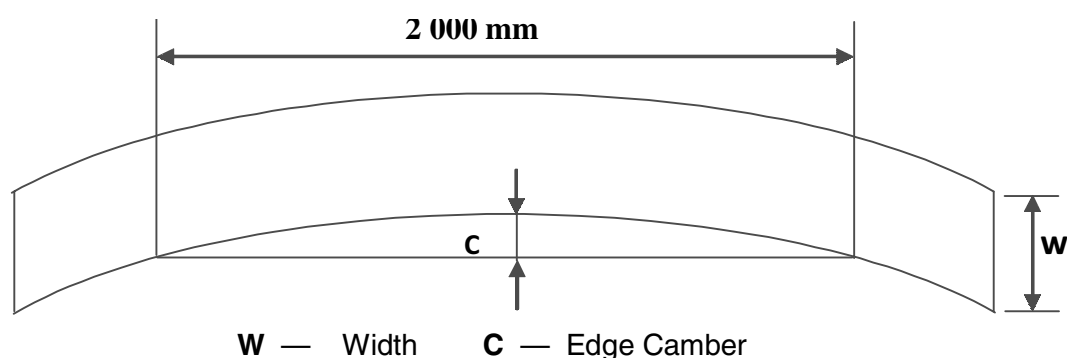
PLAN VIEW OF SHEET/STRIP SHOWING EDGE CAMBER
